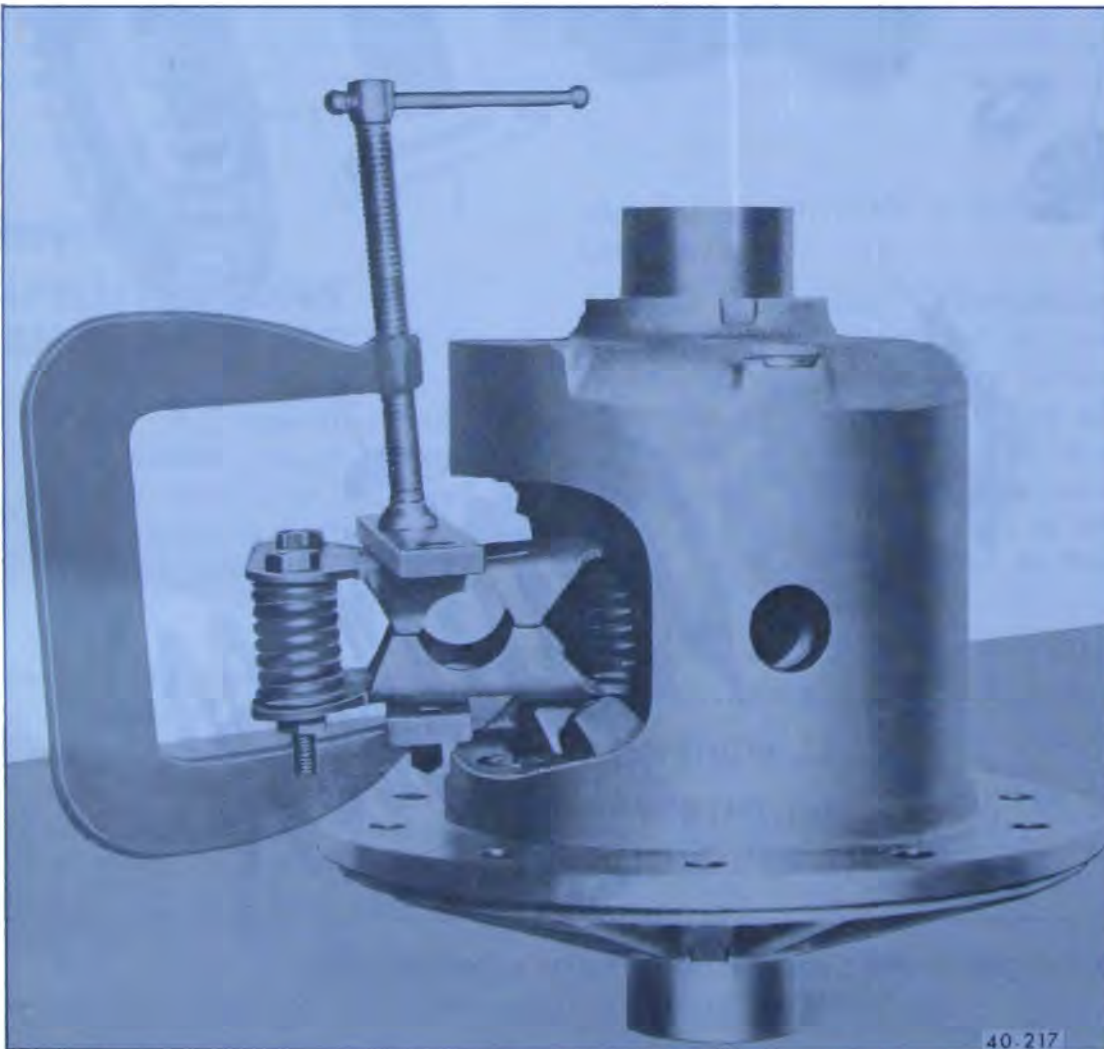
Install 1/4" Bolts, Bar Stock and "C" Clamp
